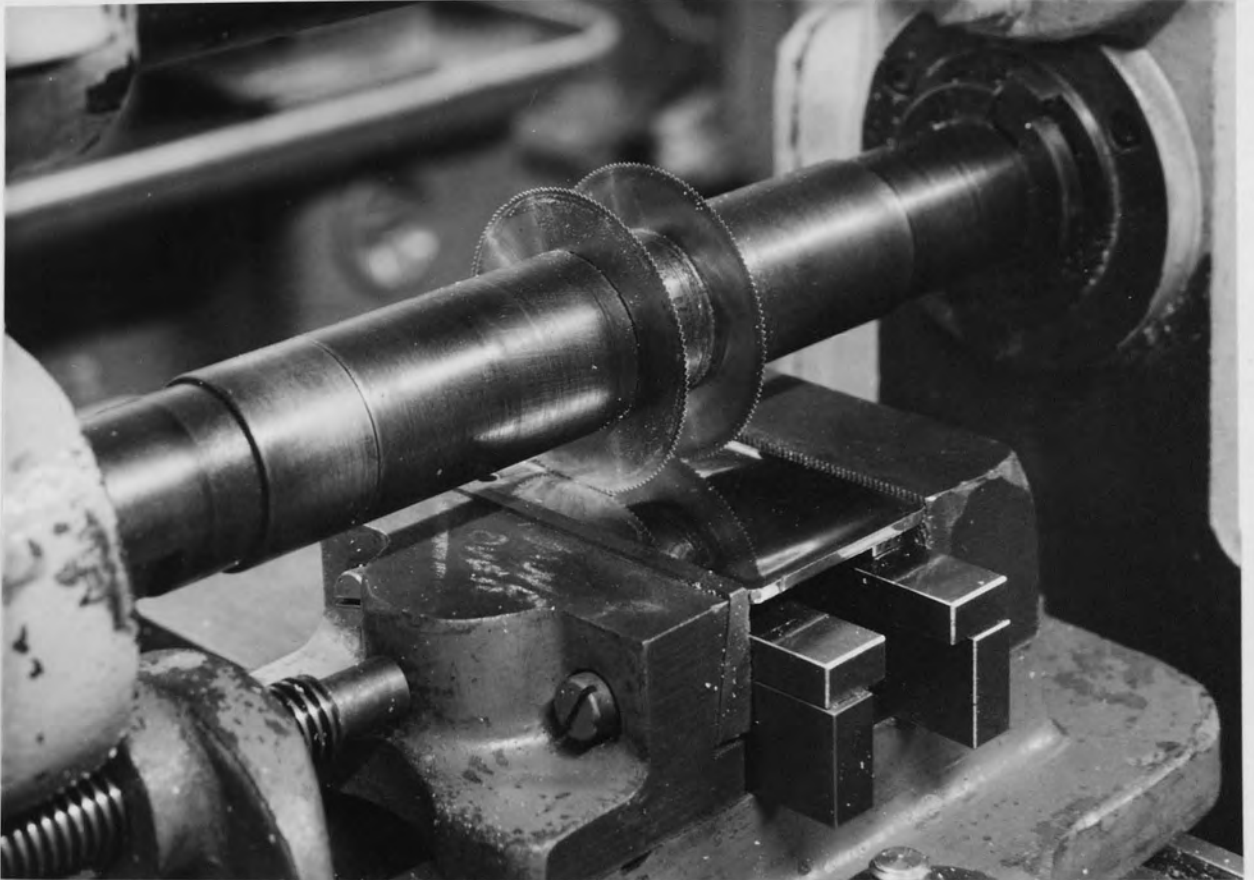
Milling machine attachment used for slitting panels for peel adhesion testing.
